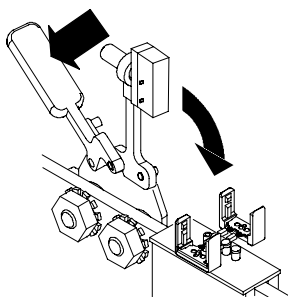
Installing the large resistor Tip-Clip assemblies on the fixture
